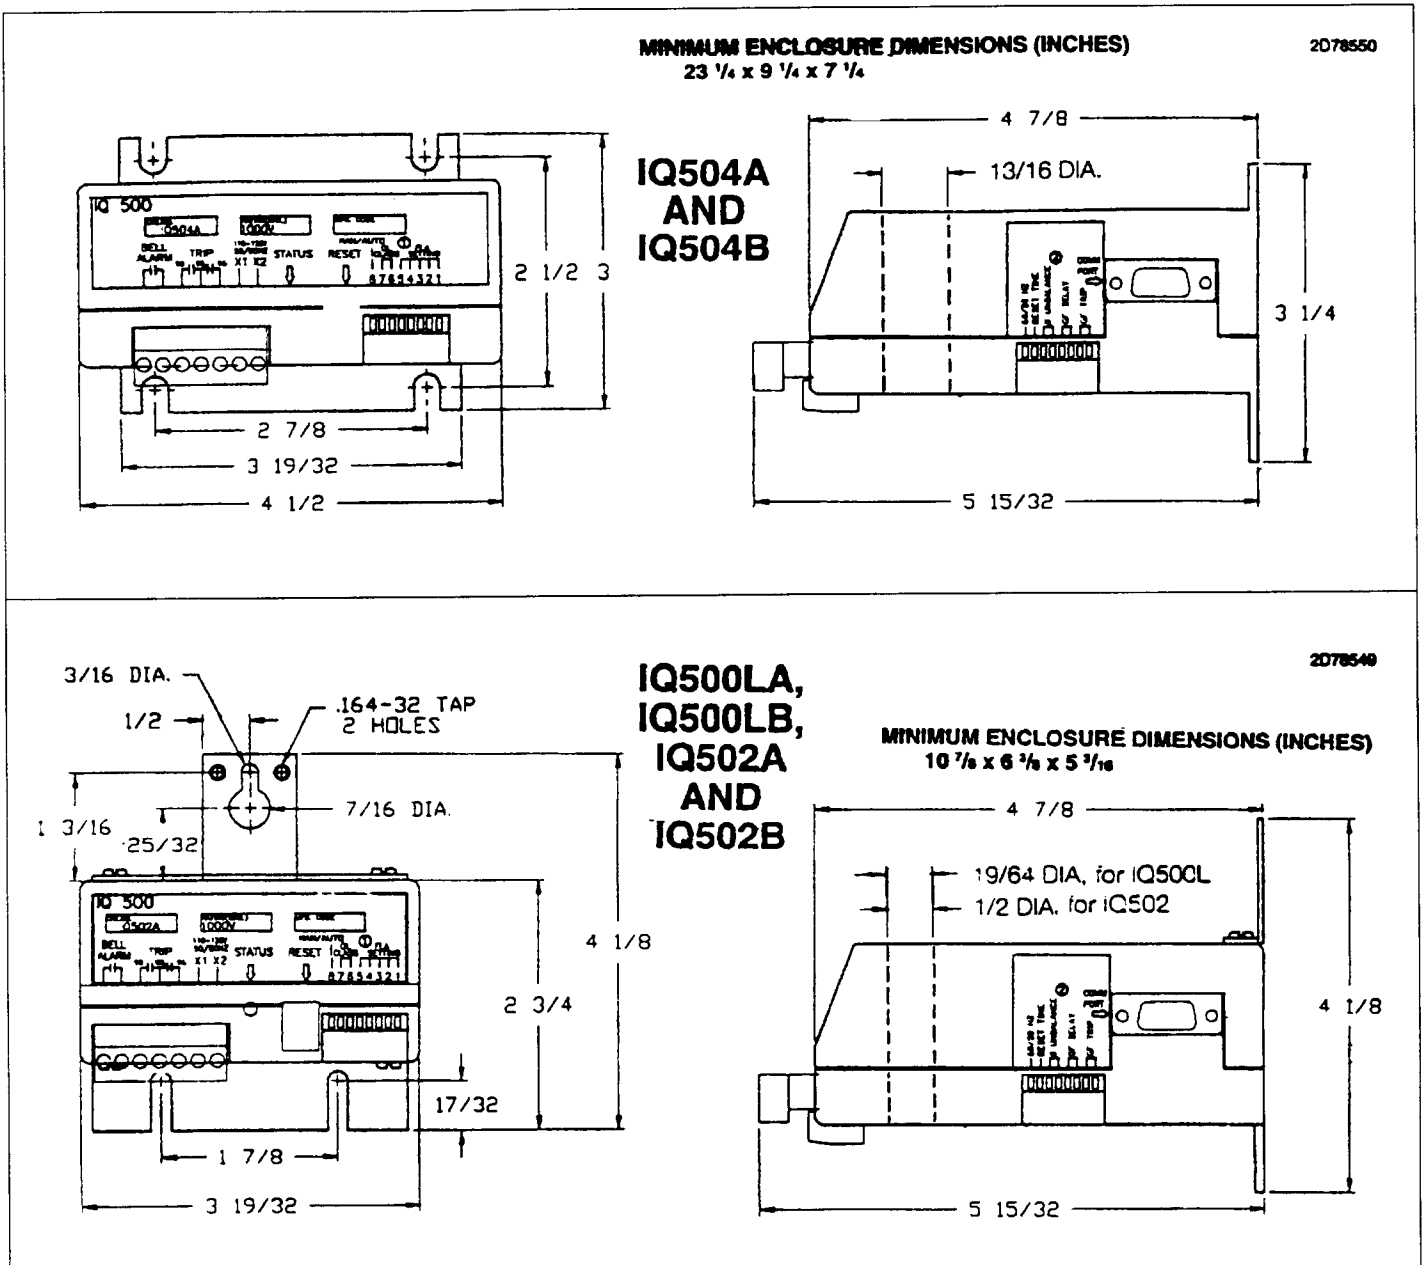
Outline and Mounting Dimensions (dimensions in inches)
